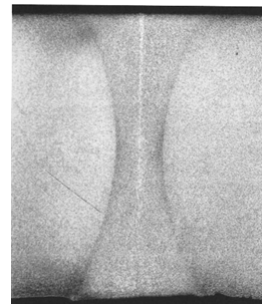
Macrograph of weld seam in tube cross-section.
